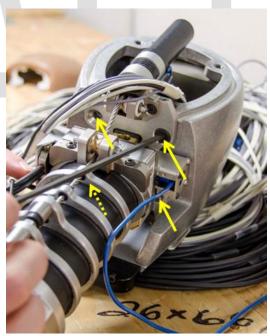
FHCS connecting head/neck mounting platform to skull assembly
